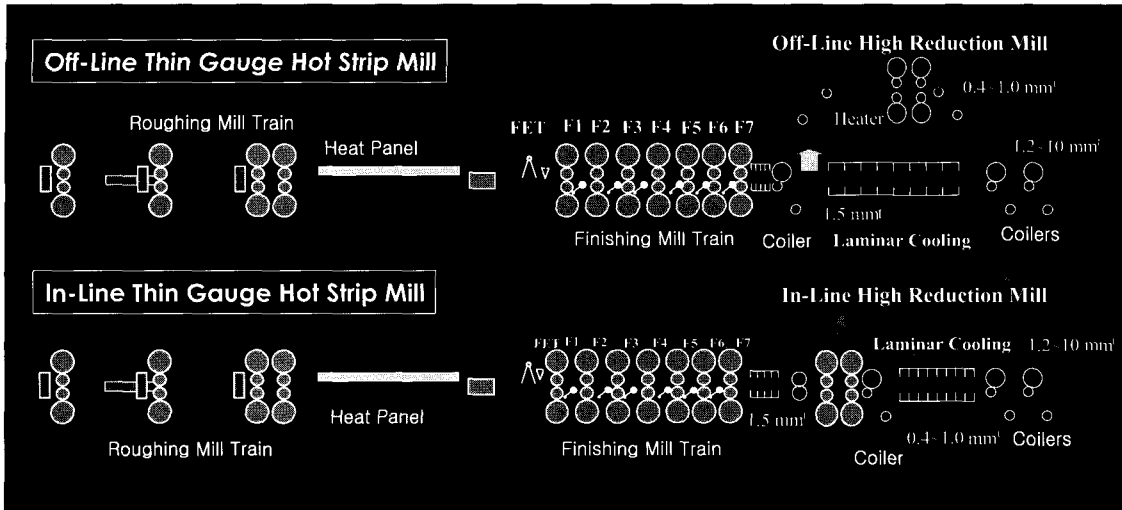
New ways to produce thin gauge hot strip using modified conventional continuous hot strip mill line: Off-line thin gauge hot strip mill and in-line thin gauge hot strip mill line
